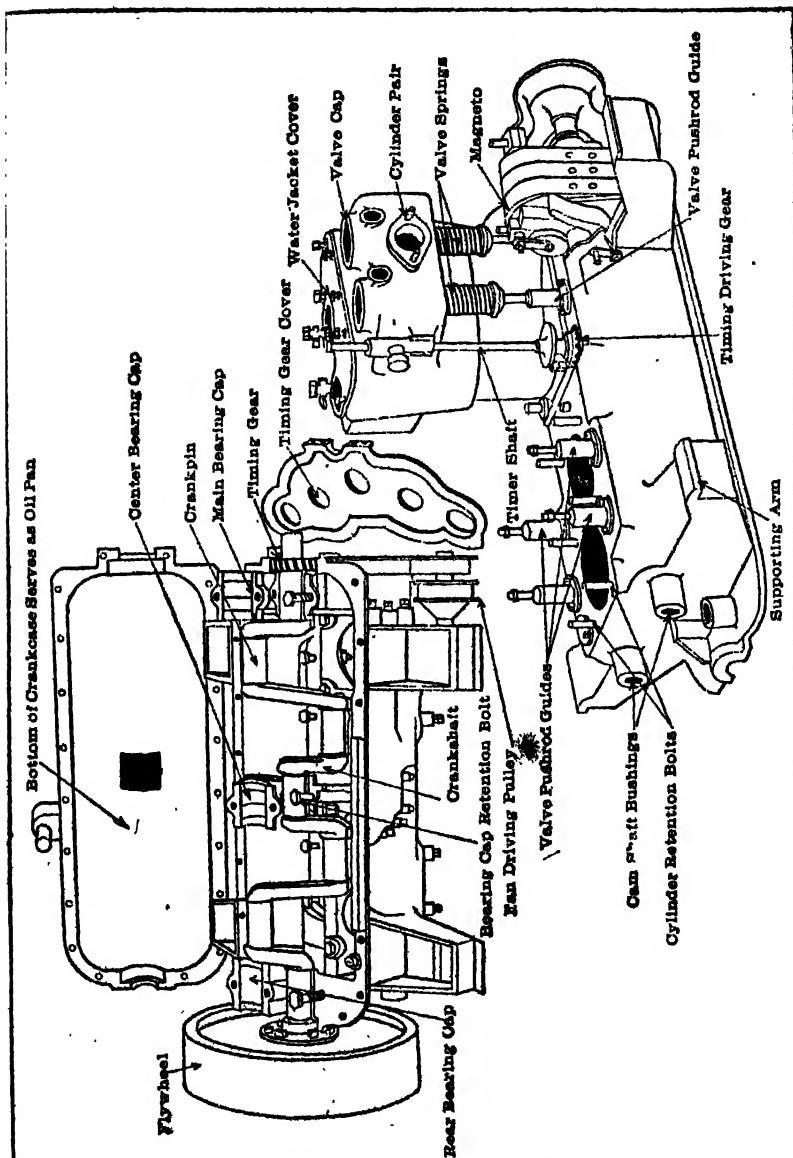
Views of Partially Dismantled Automobile Engine.
